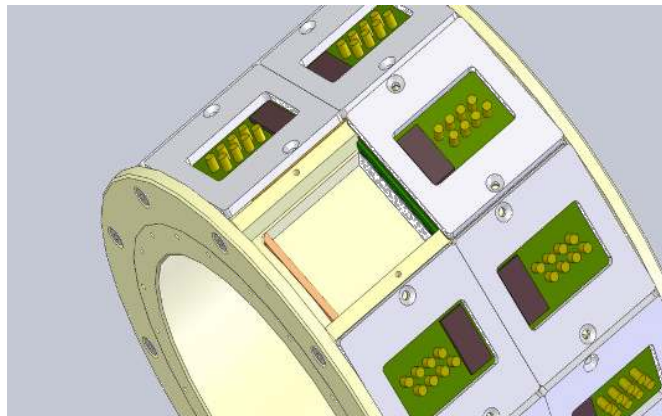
CAD drawing of the final MRI compatible pre-clinical system assembly.
